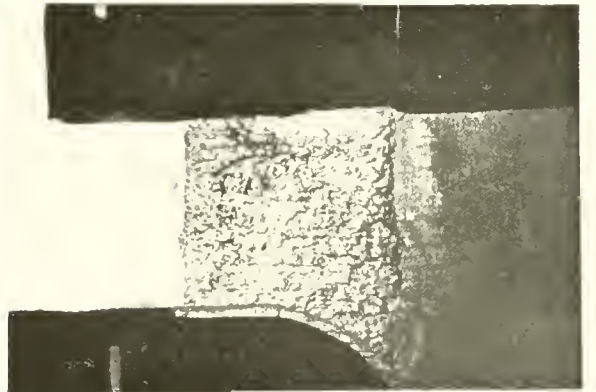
, AFTER. The Completed Weld. A piece of boiler plate is placed around the bottom of the gap as shown in the illustration, in order to hold the new metal in place during welding.
